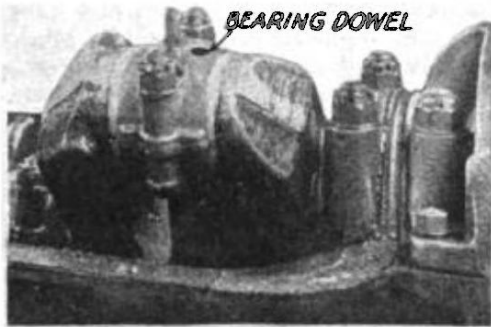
Rod Caps Should be Replaced With Dowel of Bearing-in Cap Facing Timing Gear End of Case so That Oil Scoop Will Face in Right Direction.
